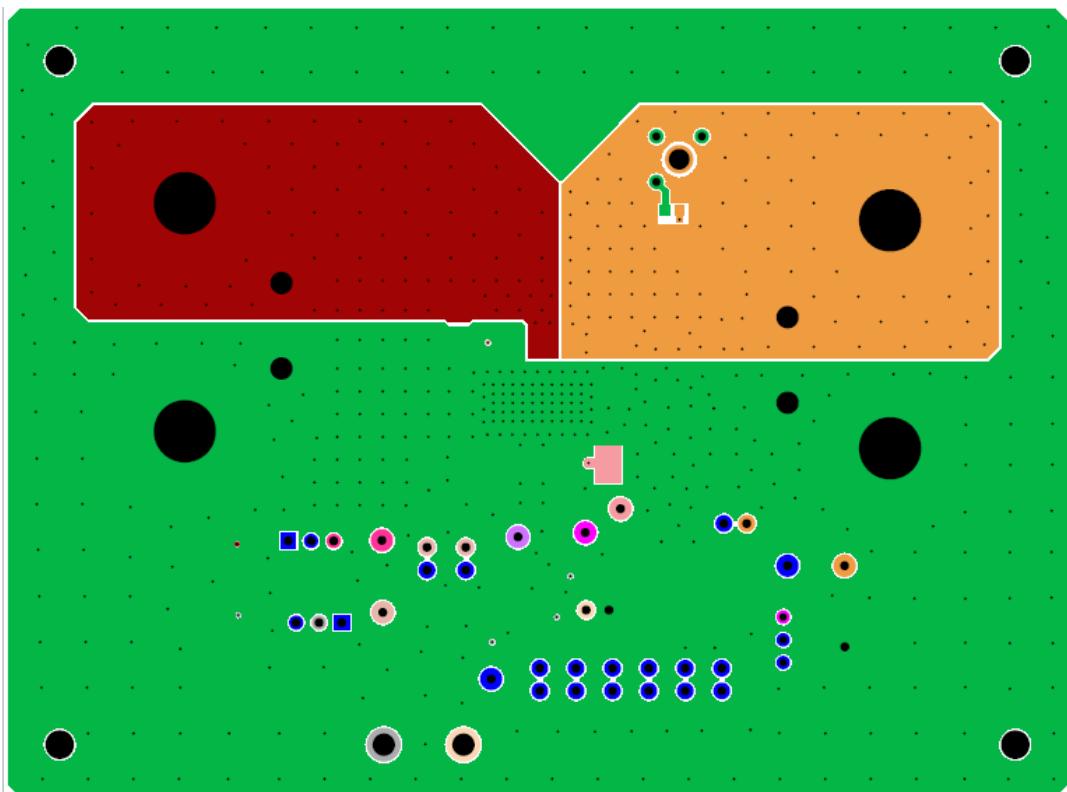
BOTTOM LAYER SOLDER SIDE
